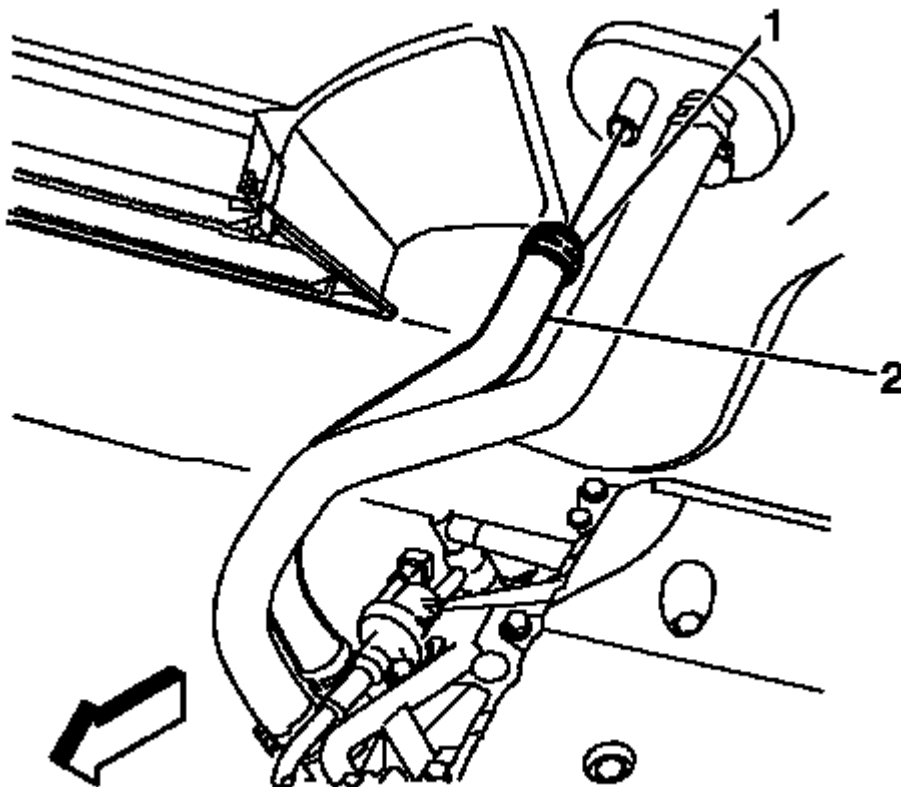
Heater Outlet Hose & Clamp At Heater Core
